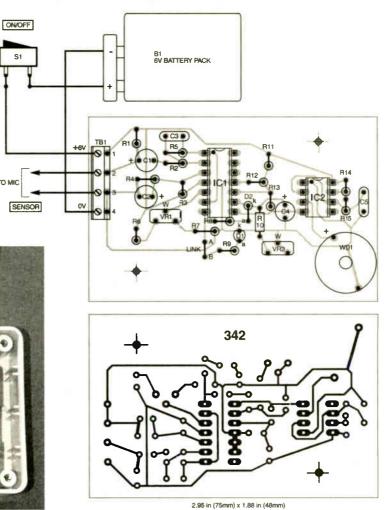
Printed circuit board component layout, full-size copper foil master and wiring
